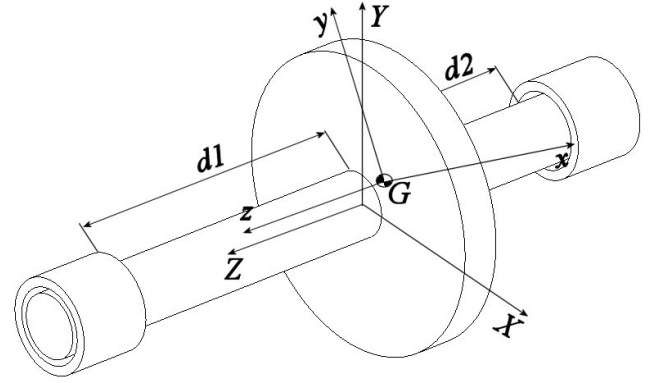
UNBALANCED ROTOR BETWEEN TWO JOURNAL BEARINGS
